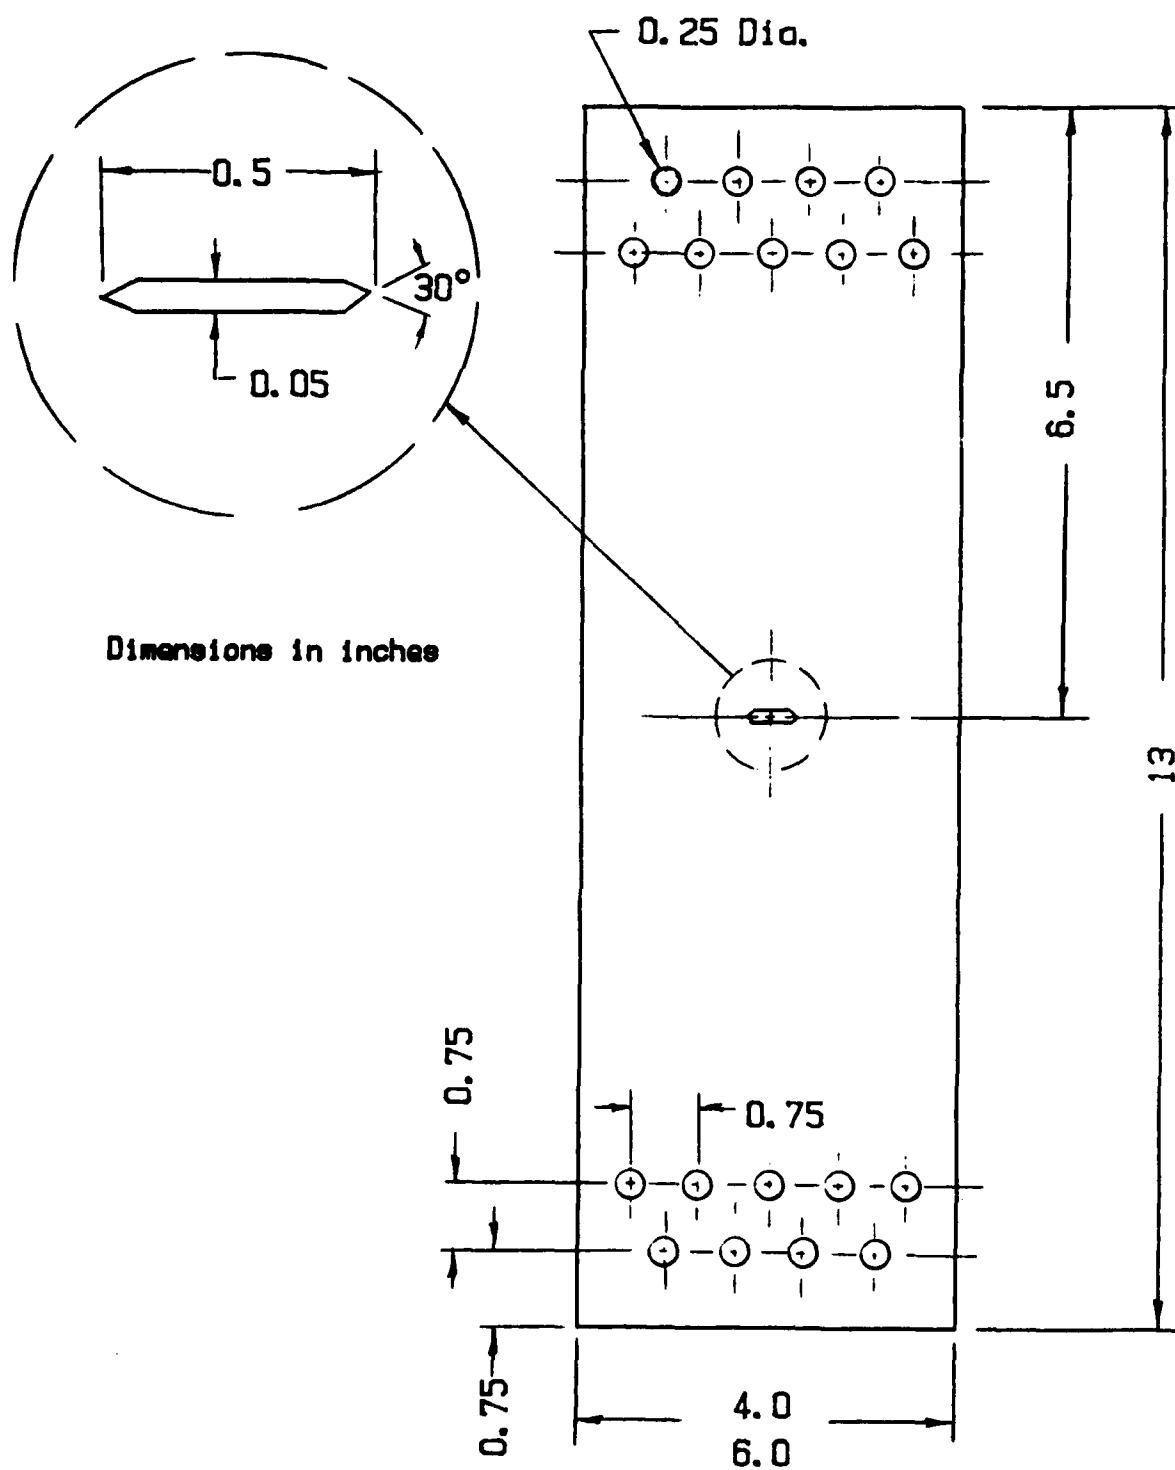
Middle Crack Tension M(T) Specimen Geometry.
